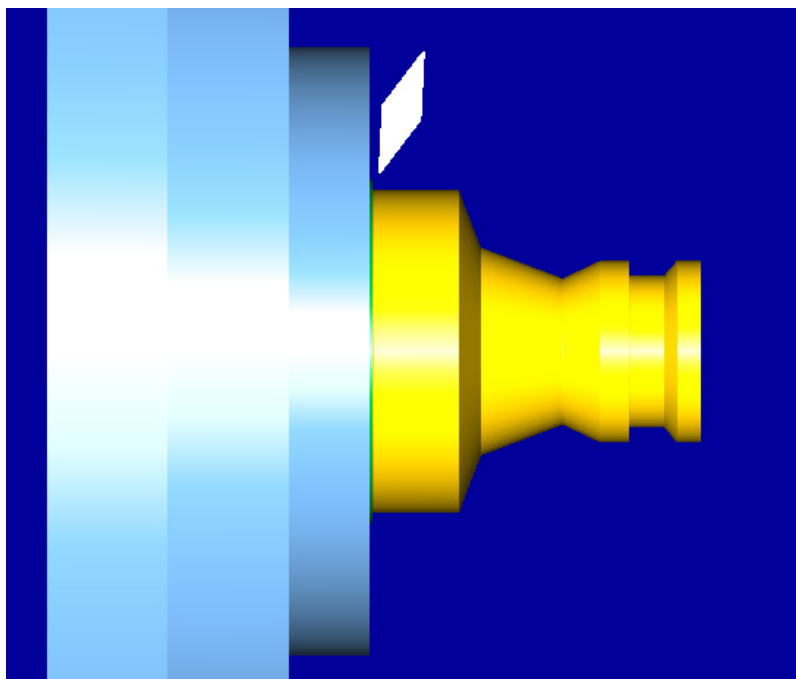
Final shape (yellow) and geometry of cutting tool (white)
